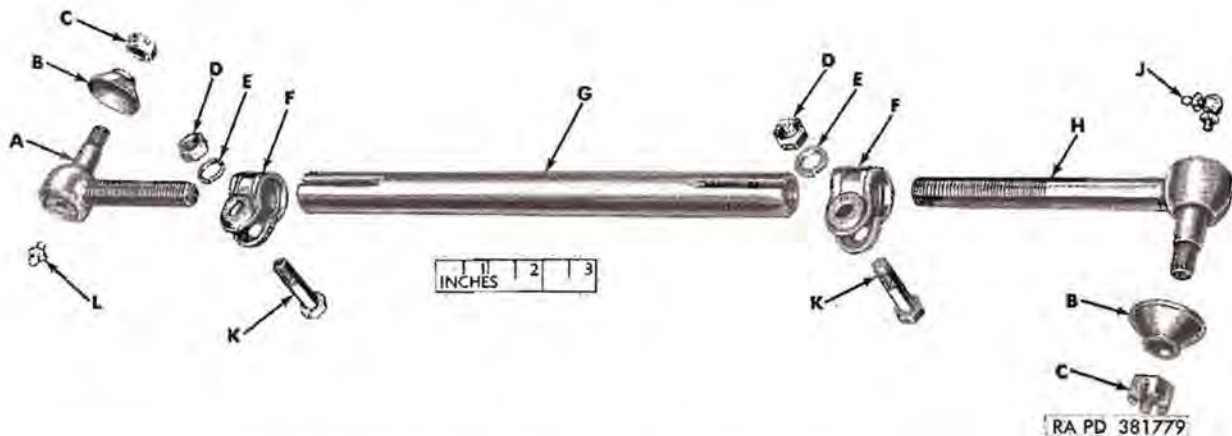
Steering system rods, levers, links, and tow bar bellcrank - exploded view.
